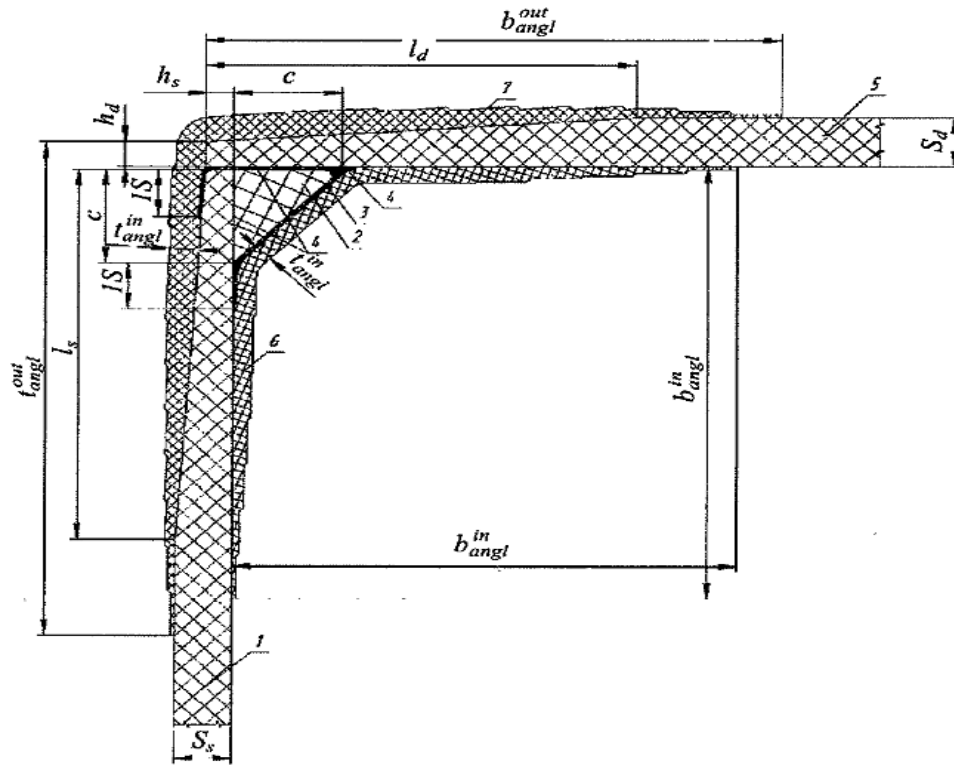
joint of side and upper deck single-skin constructions of variable thickness, with a support element installed:
